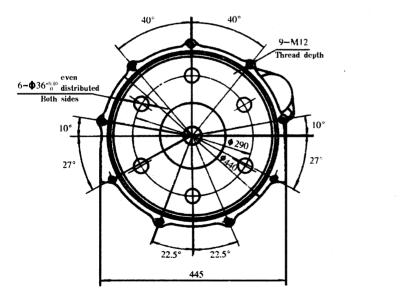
Outline drawing for 495Y -1, 495Y4 diesel engine
